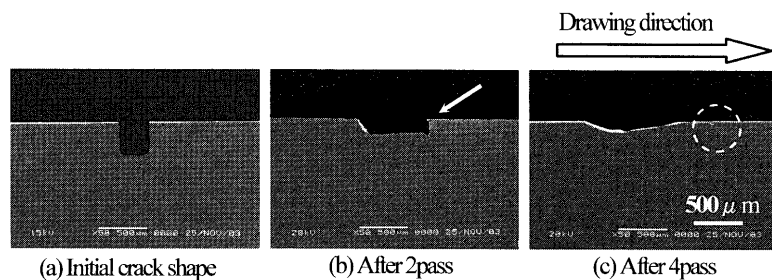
Shape changes of crack in cross-section during multi-pass drawing of wire with transversal crack of concave shape.
